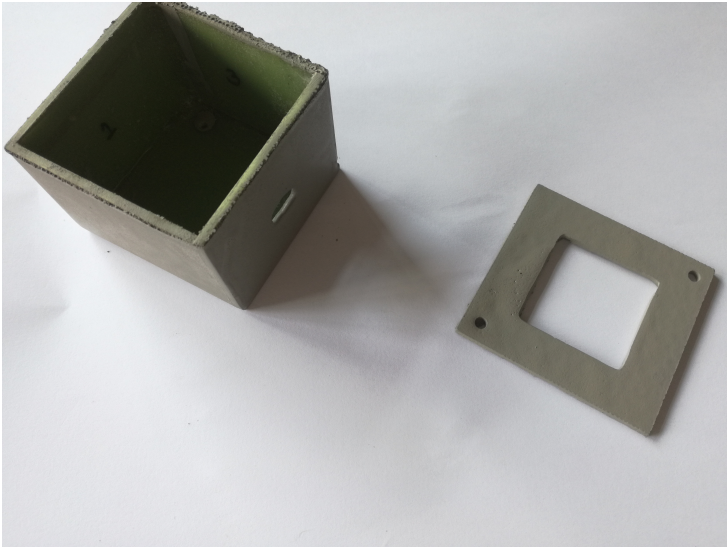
Case designed to protect the image sensor and ArduCAM USB camera shield board with the help of a manual milling machine. After the mounting with epoxi, the box was painted in grey.
